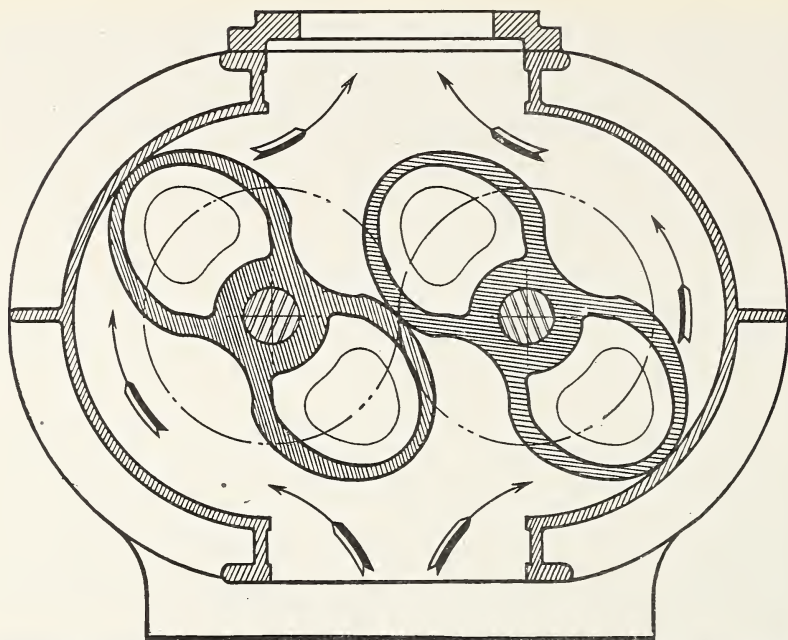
Section through a typical positive-pressure two-lobe rotary air pump used for conveying cottonseed. Rotation may be reversed if desired.
